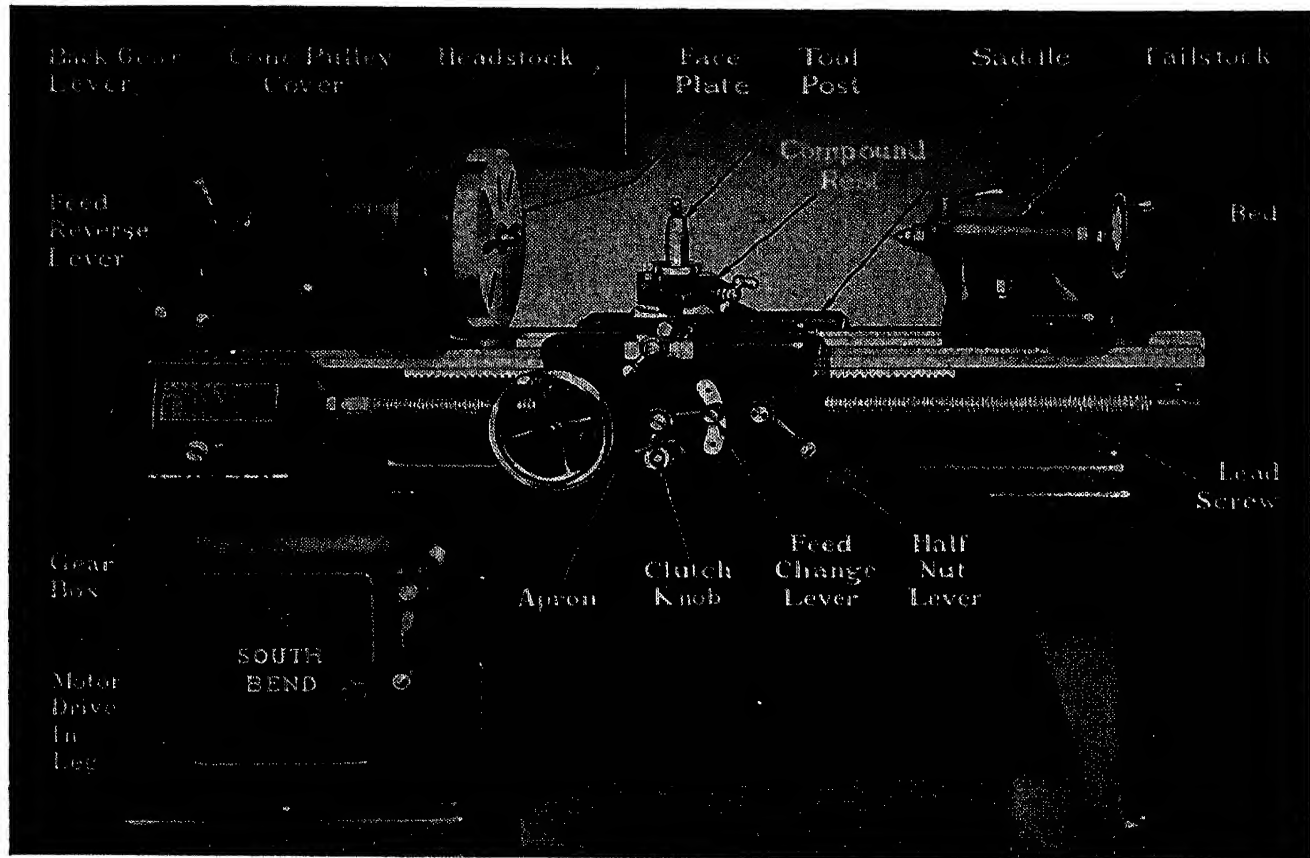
A typical engine lathe. (Courtesy South Bend Lathe Works.)
